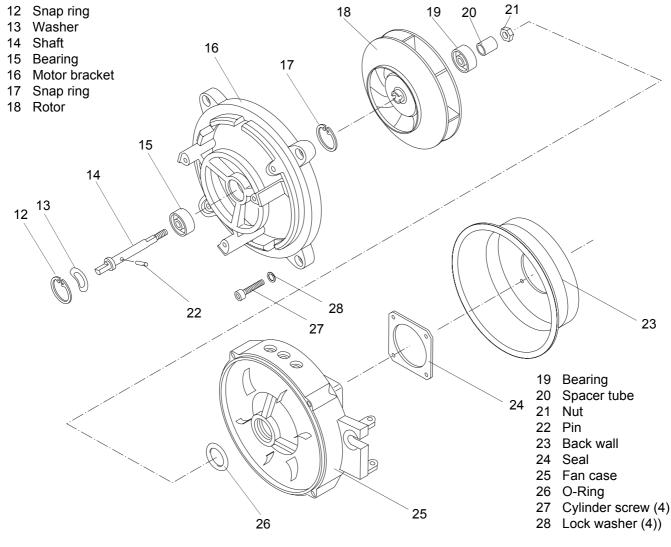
Burner head, disassembly and reassembly (page 2 of 2)
